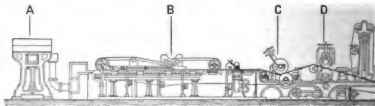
FOURDRINIER MACHINE IN SECTION.
